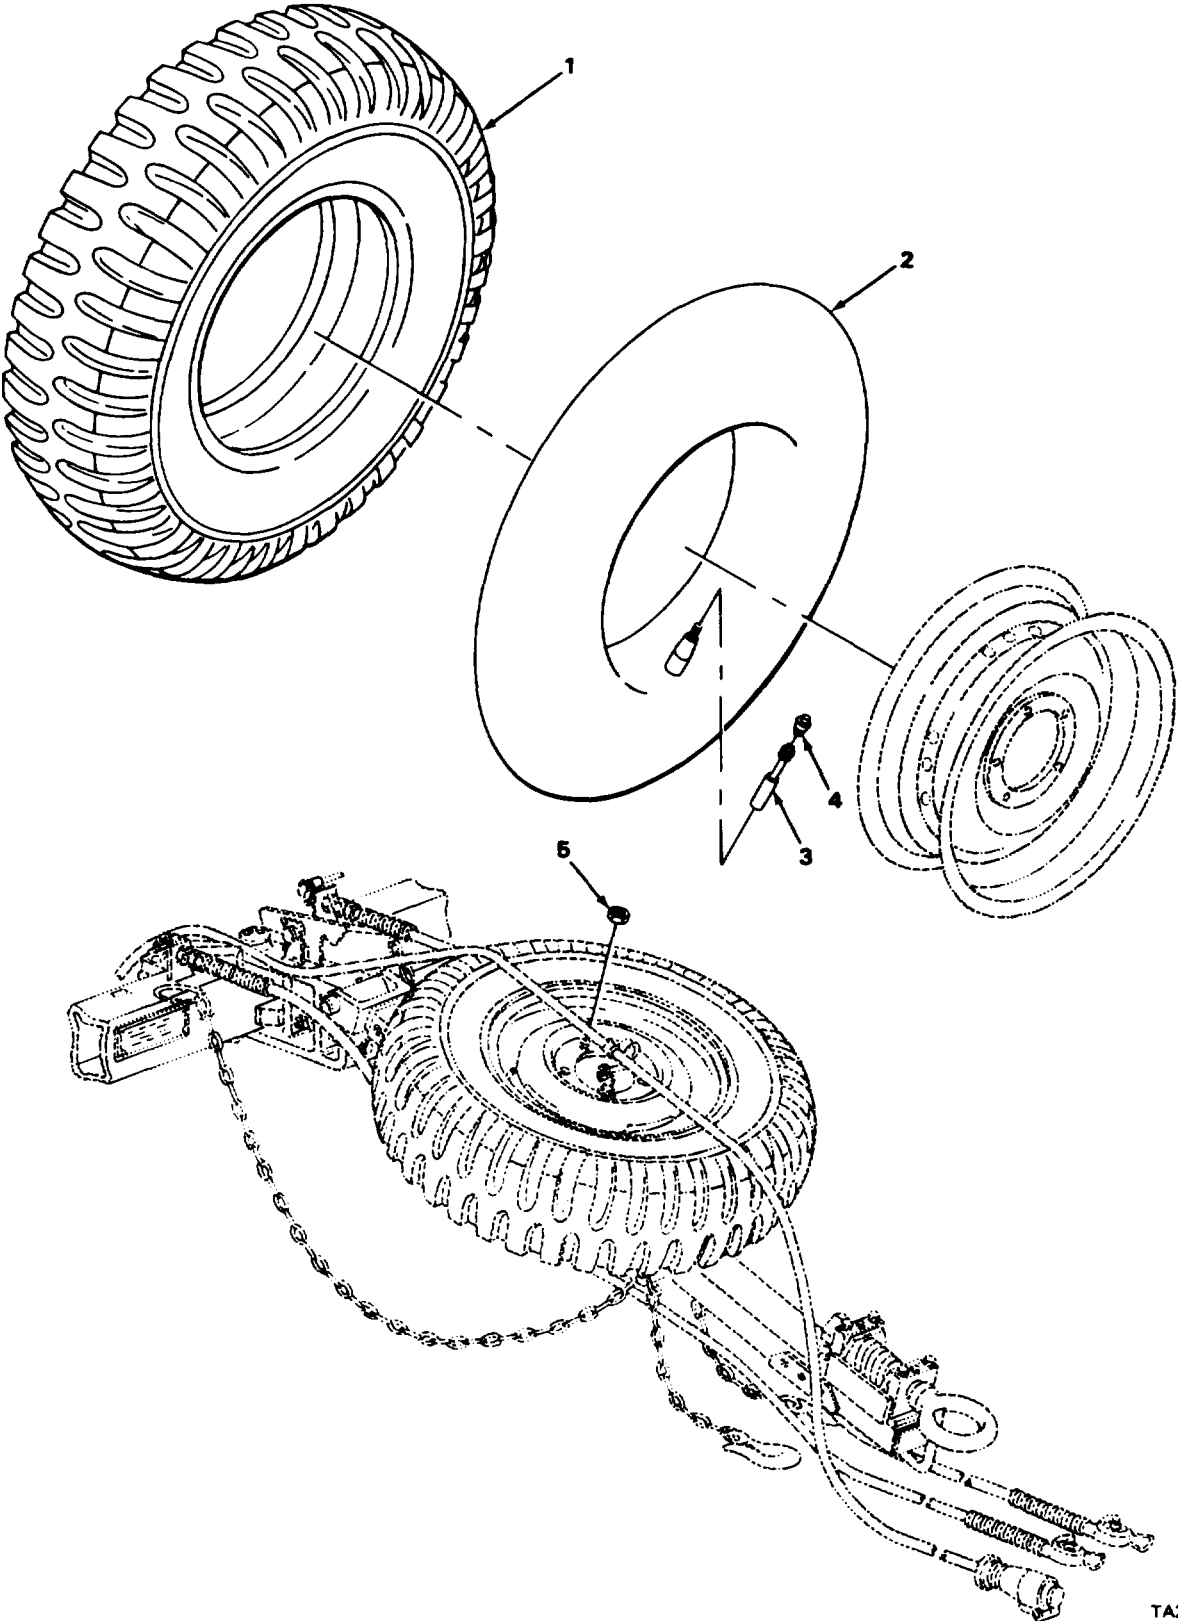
WHEEL AND HUB ASSEMBLY.
